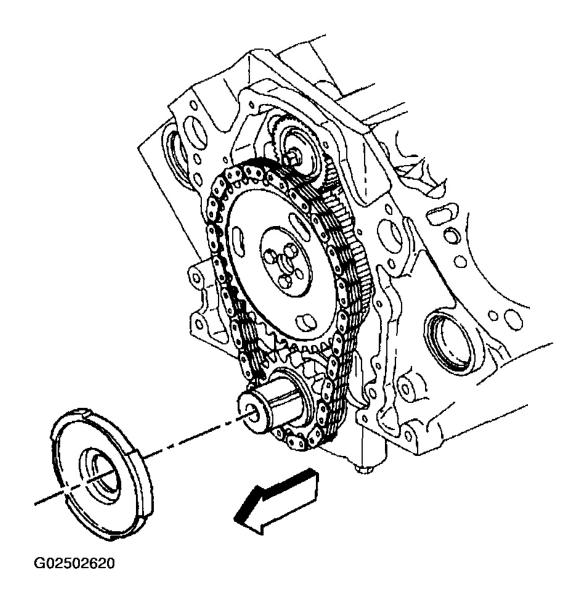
Removing Crankshaft Position Sensor Reluctor Ring Courtesy of GENERAL MOTORS CORP.
